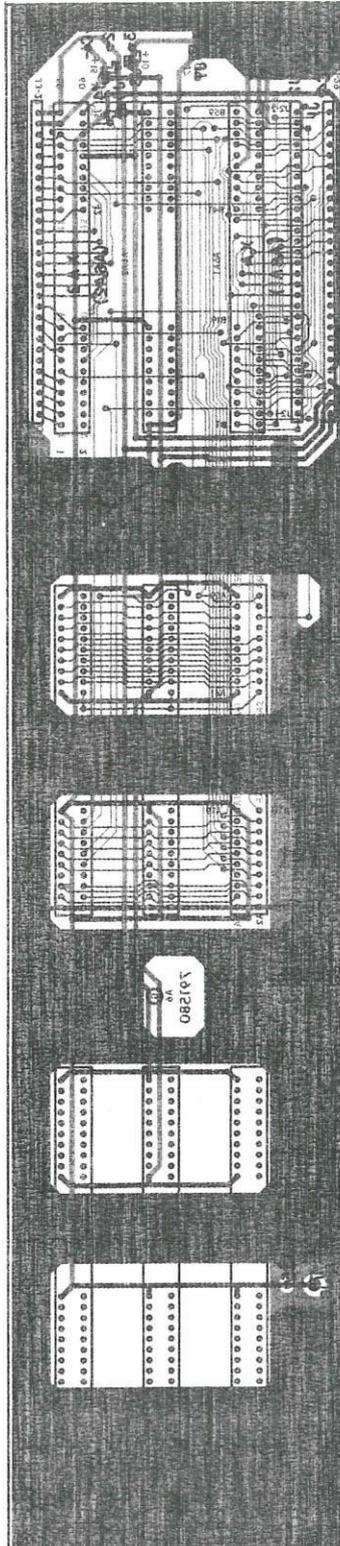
Tracks in the later versions of the A6 motherboard PCB (bottom side)
